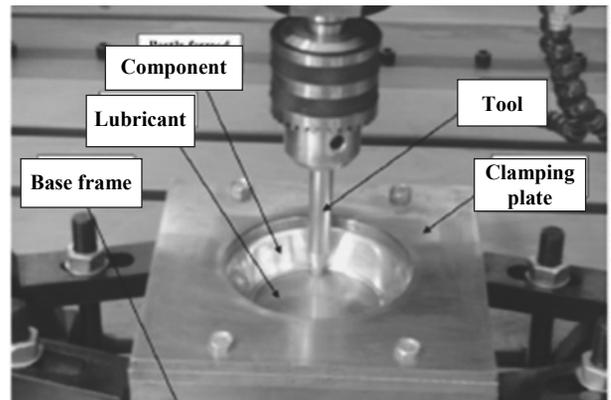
The CNC milling machine with the tool setup applied during the experiments
